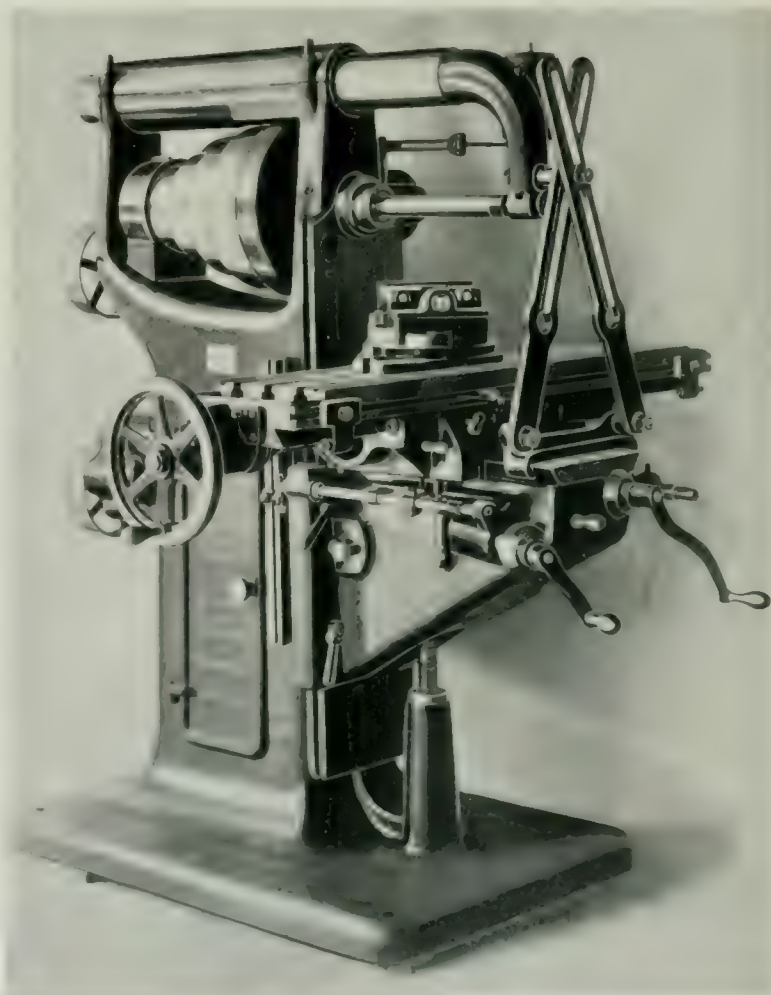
NO. 2 PLAIN MILWAUKEE MILLING MACHINE.
